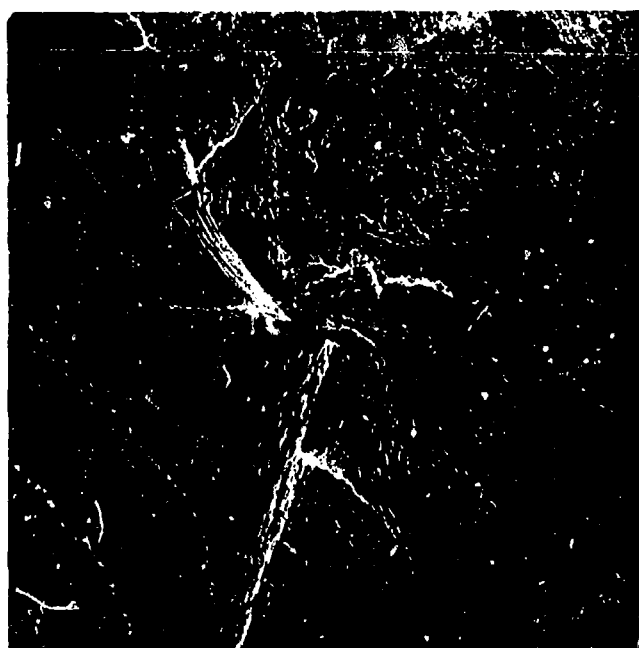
Fatigue initiation site on the fracture surface of an A-514 weldment containing porosity, 50x.
